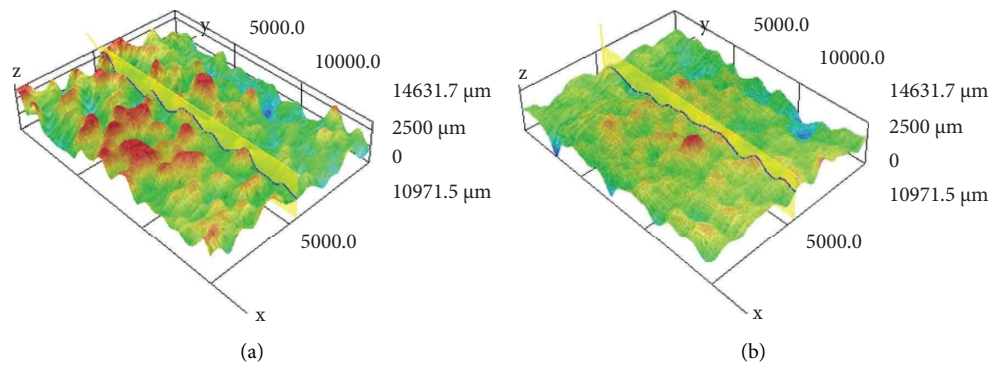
Surface state of workpiece before and after application of damper. (a) Surface state of workpiece without damper. (b) Surface state of workpiece with damper.
